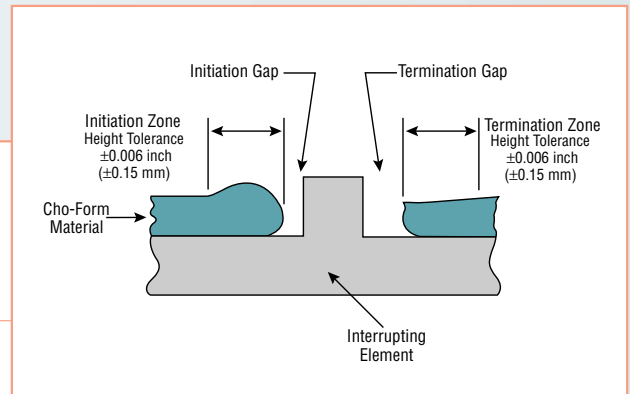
Location tolerances for bead initiation & termination zones (cross-sectional view)
